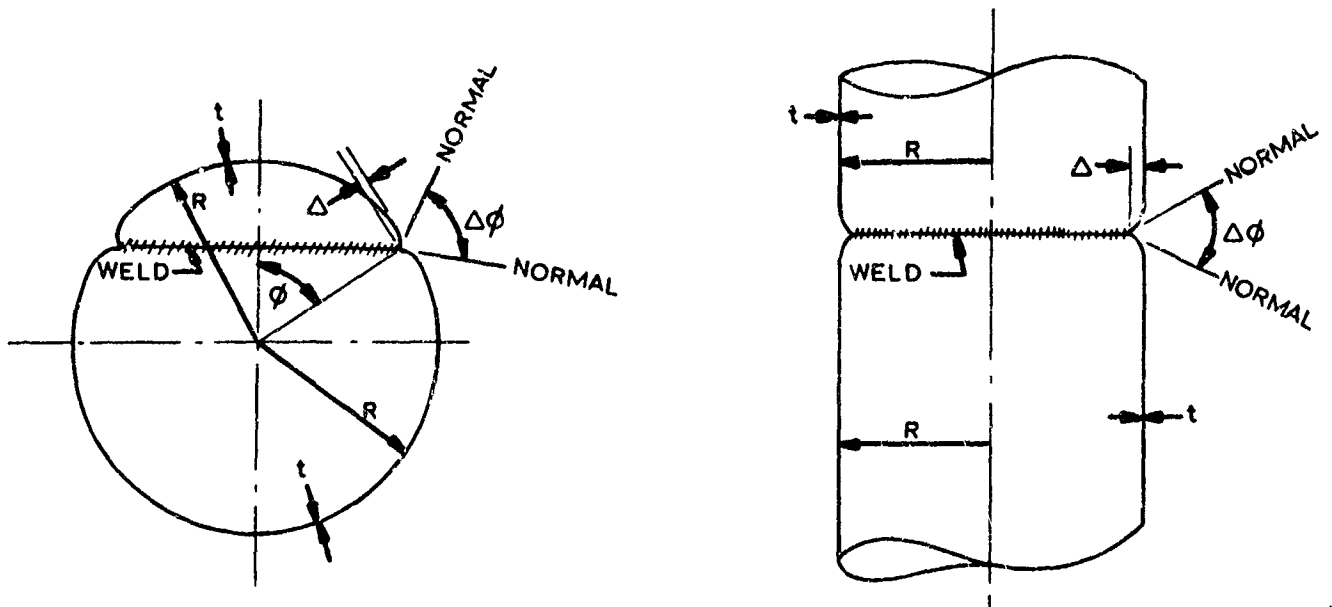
Weld Sinkage Geometry in Spheres and Cylinders
